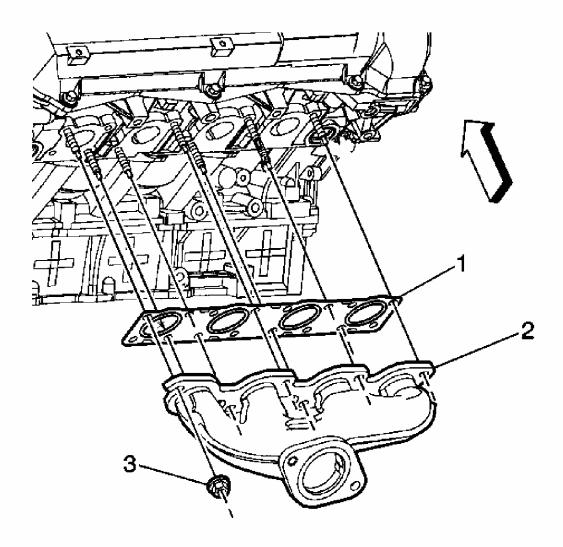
Identifying Right Exhaust Manifold Retaining Nuts Courtesy of GENERAL MOTORS CORP.
